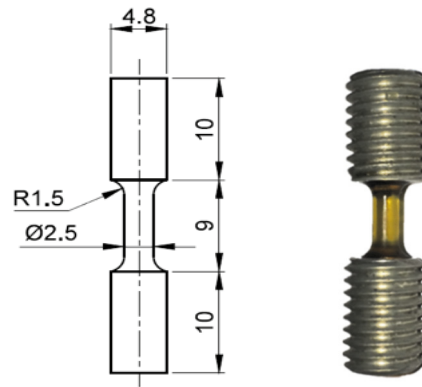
Dimensions of the tensile sample used (left) and image of the sample with the threaded caps (right)
